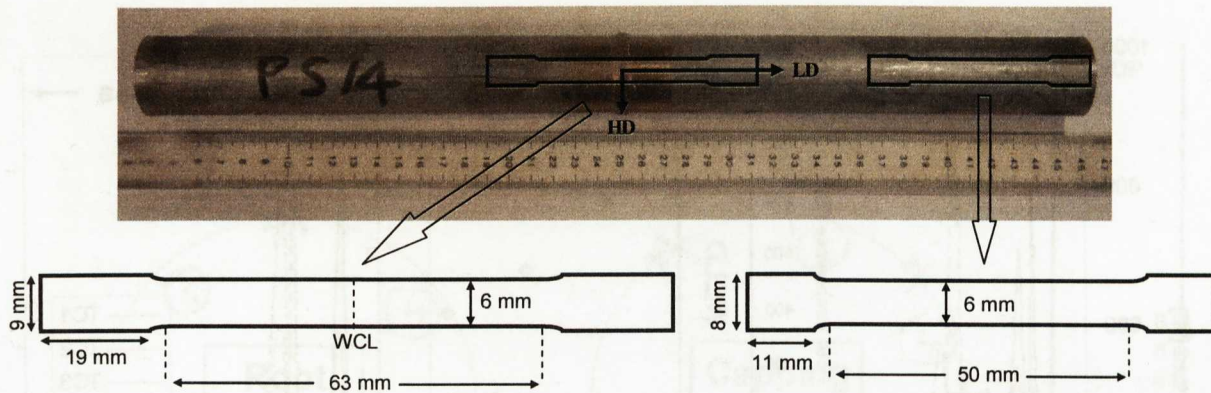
The cut position (top) and the dimensions of the cross-weld test specimens (bottom left) and remote-end specimens (bottom right). Both types of specimen are 3mm thick. (LD: longitudinal direction of the tube // pre-straining direction, HD: hoop direction of the tube \perp pre-straining direction, RD (into the page): radial direction of the tube \perp pre-straining direction)
